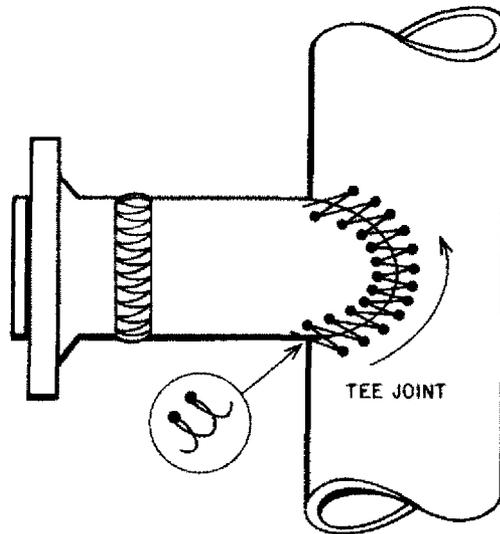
Weave pattern for welding T-joint with intersecting pipe located at the side of the vertical pipe.
